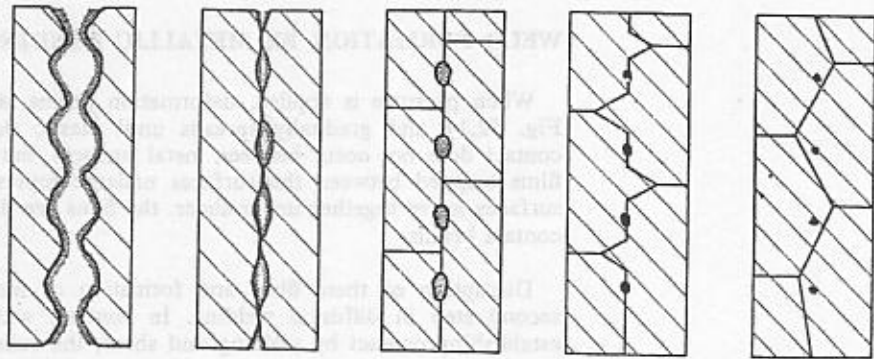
Overall two step diffusion welding process. (Steps expanded in sequential form for clarity.)
